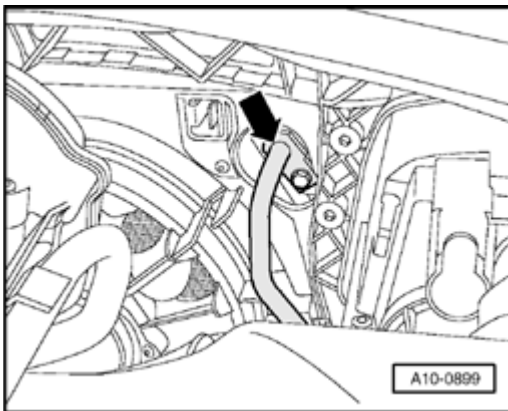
Screwing Stud Into Toothed Belt Tensioning Element & Hex Nut Onto Stud Using Large Washer
